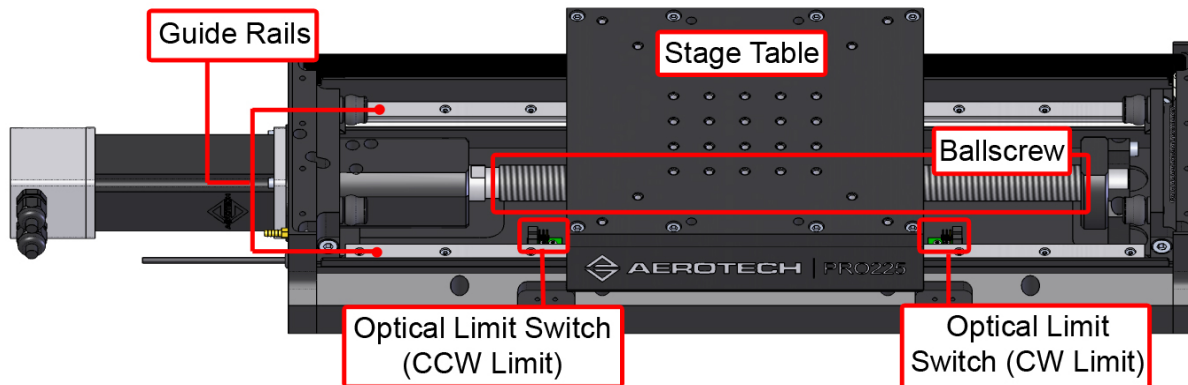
Internal View of a Typical Stage Showing Limit Switches
